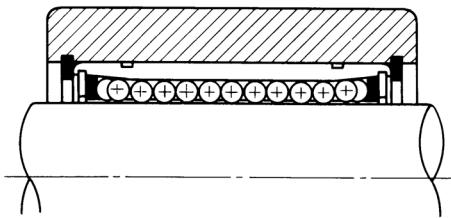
The bearing installation method shows stop rings fixed into the inner grooves of a housing.
